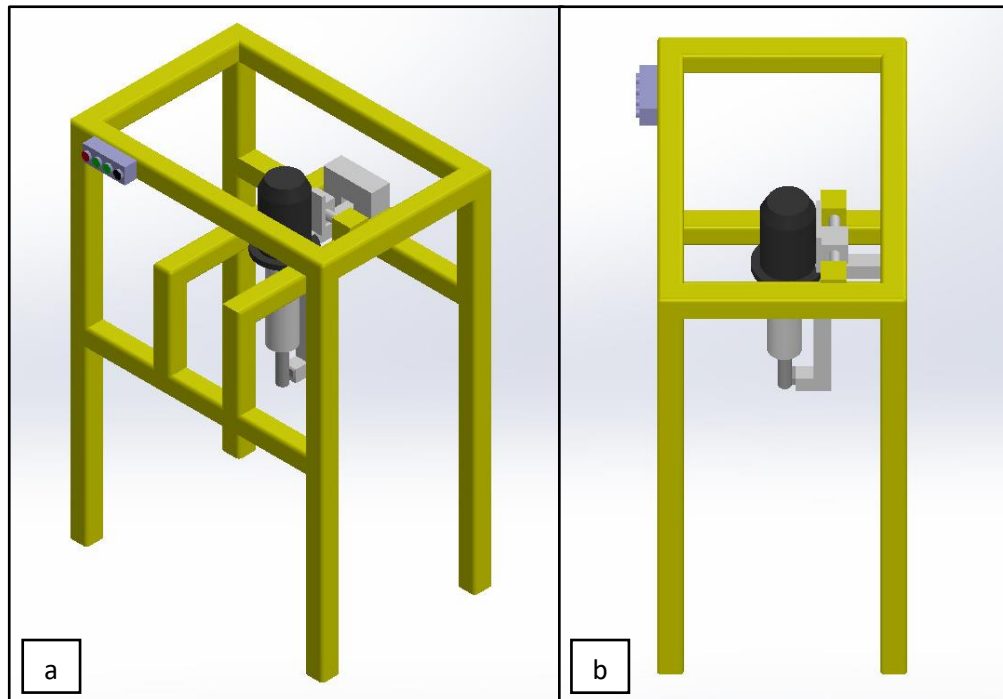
3D drawing of the new test rig: isometric view (a); side view (b).
